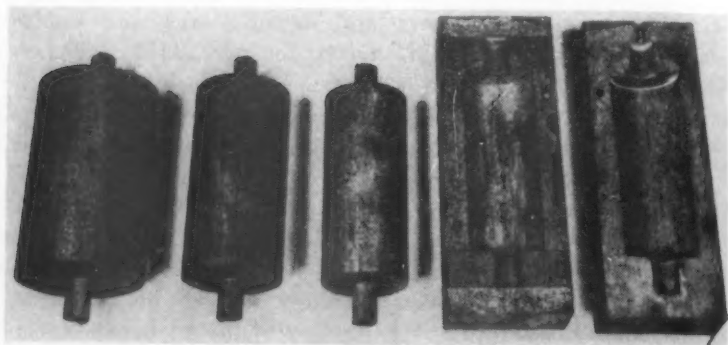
CORE BOX AND PATTERNS USED TO MAKE TEST CASTINGS.
